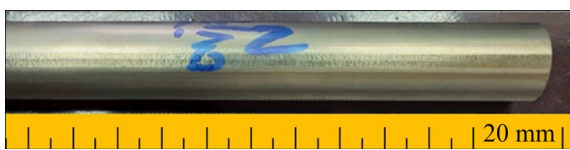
Photo of titanium welded tube fabricated by high speed tandem TIG welding
